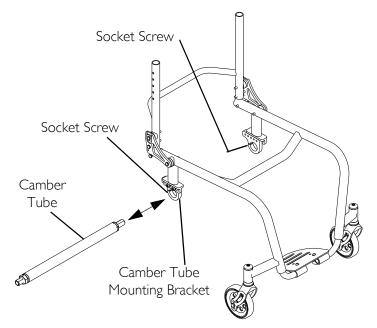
Adjusting Wheelbase Length (Adjusting Center of Gravity)
